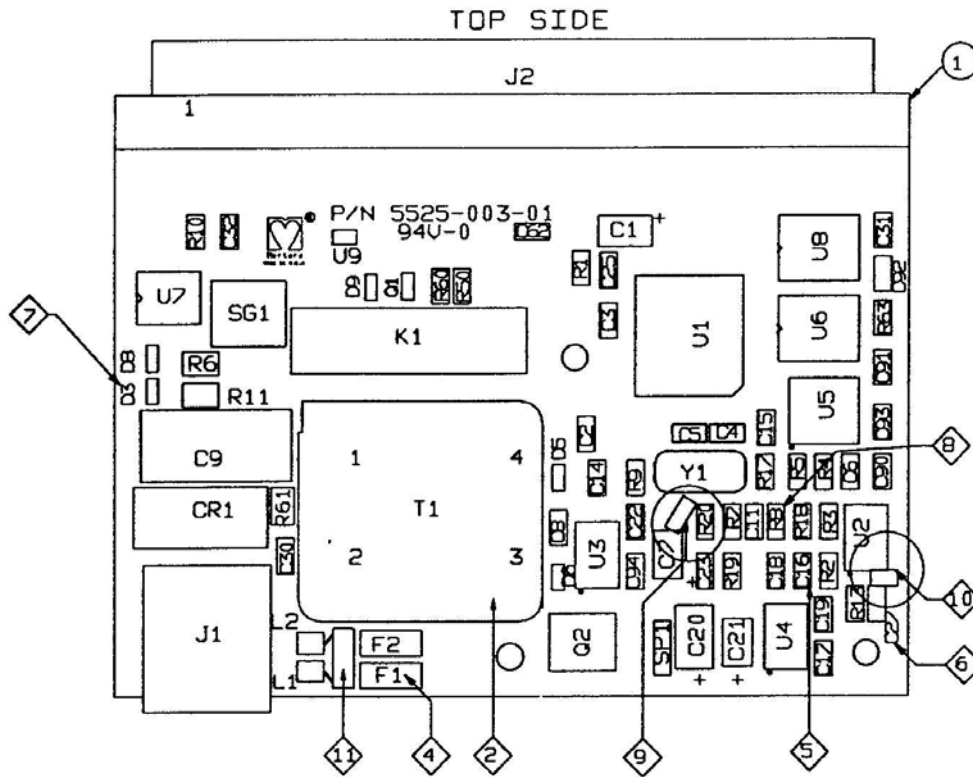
Fig B-e Modem Module (MMM) 16 MRAM Printed Circuit Board Assembly Ref: 26025-003-51
